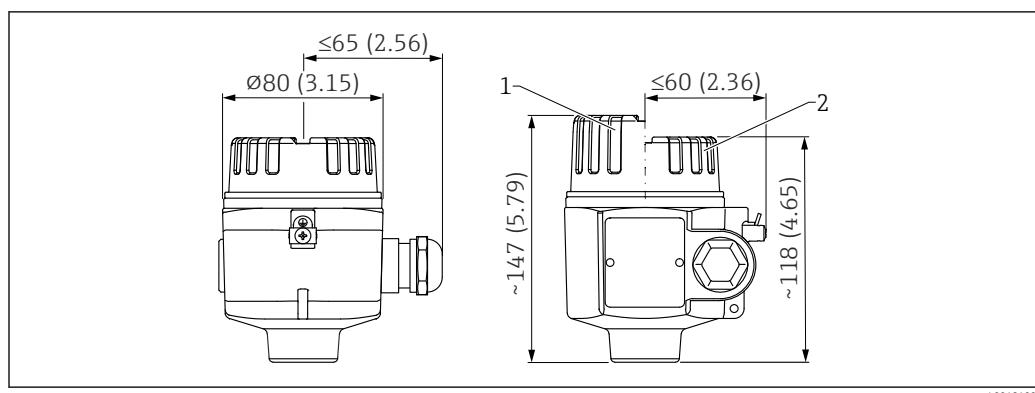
Dimensions of aluminum housing, with adapter screwed onto sensor. Unit of measurement mm (in)
